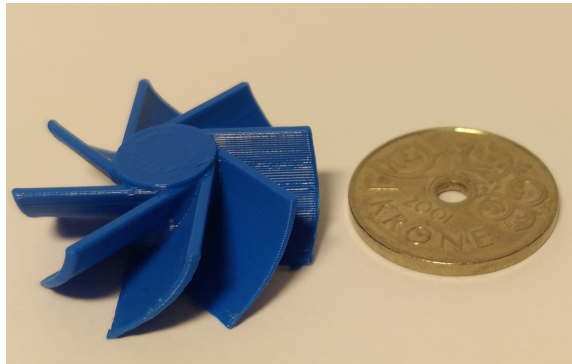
3D printed runner. Photo and print by Lars Røed Ramstad.
